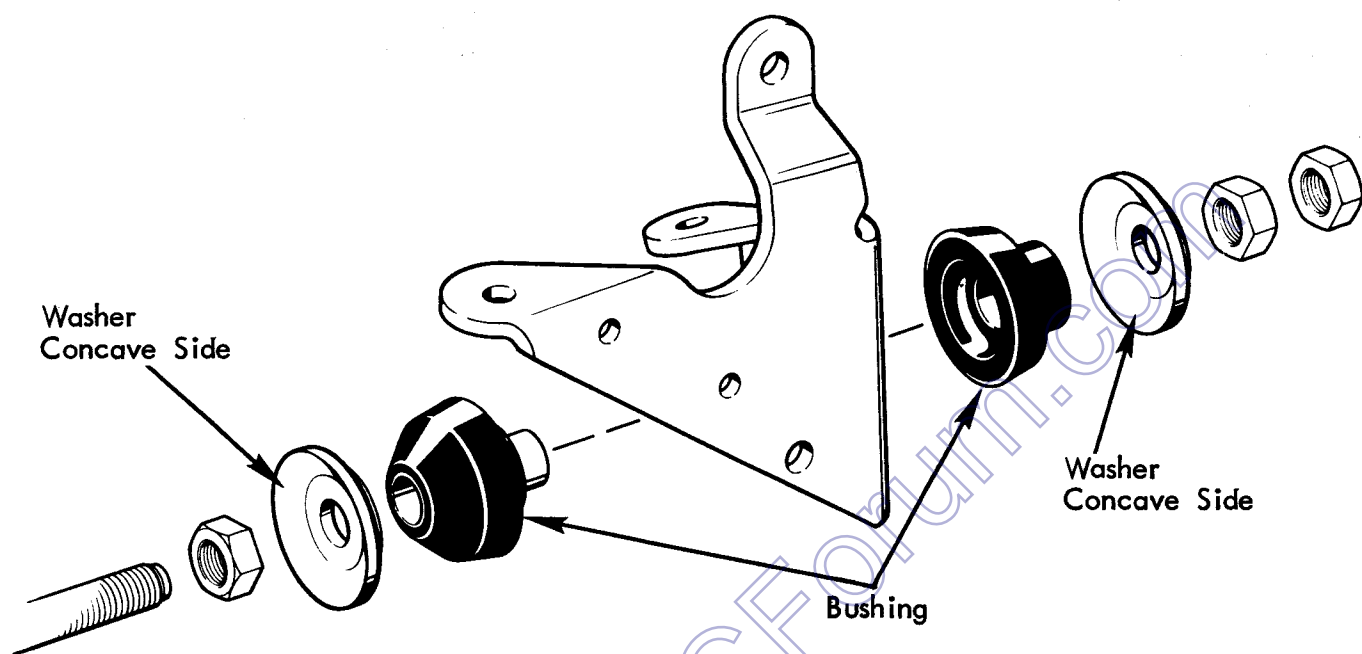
TWO PIECE BUSHING ASSEMBLY SEQUENCE
